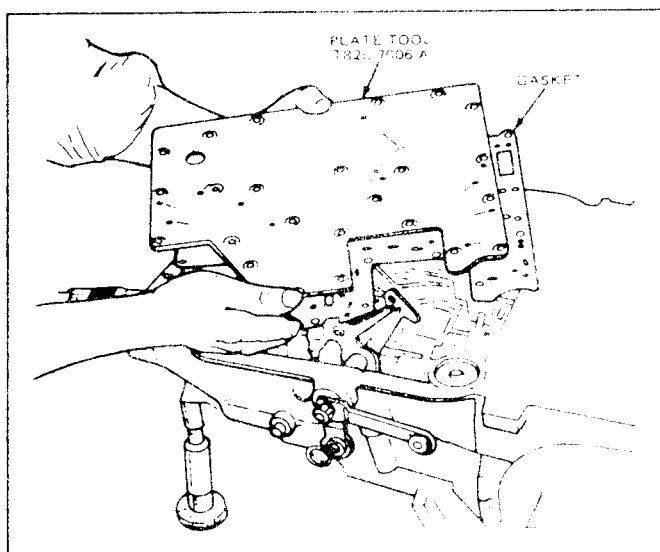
Installing Air Pressure Plate Service Tool and Main Control Gasket—AOD
